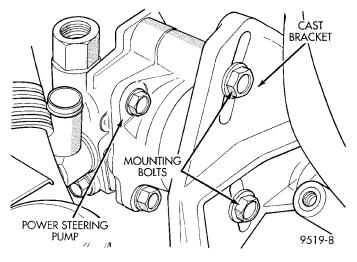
Power Steering Pump Mounting Bolts (Rear)
